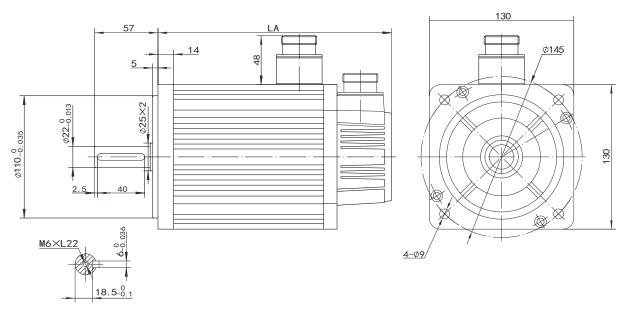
Installation dimension of WE series 130 flange servo motor
